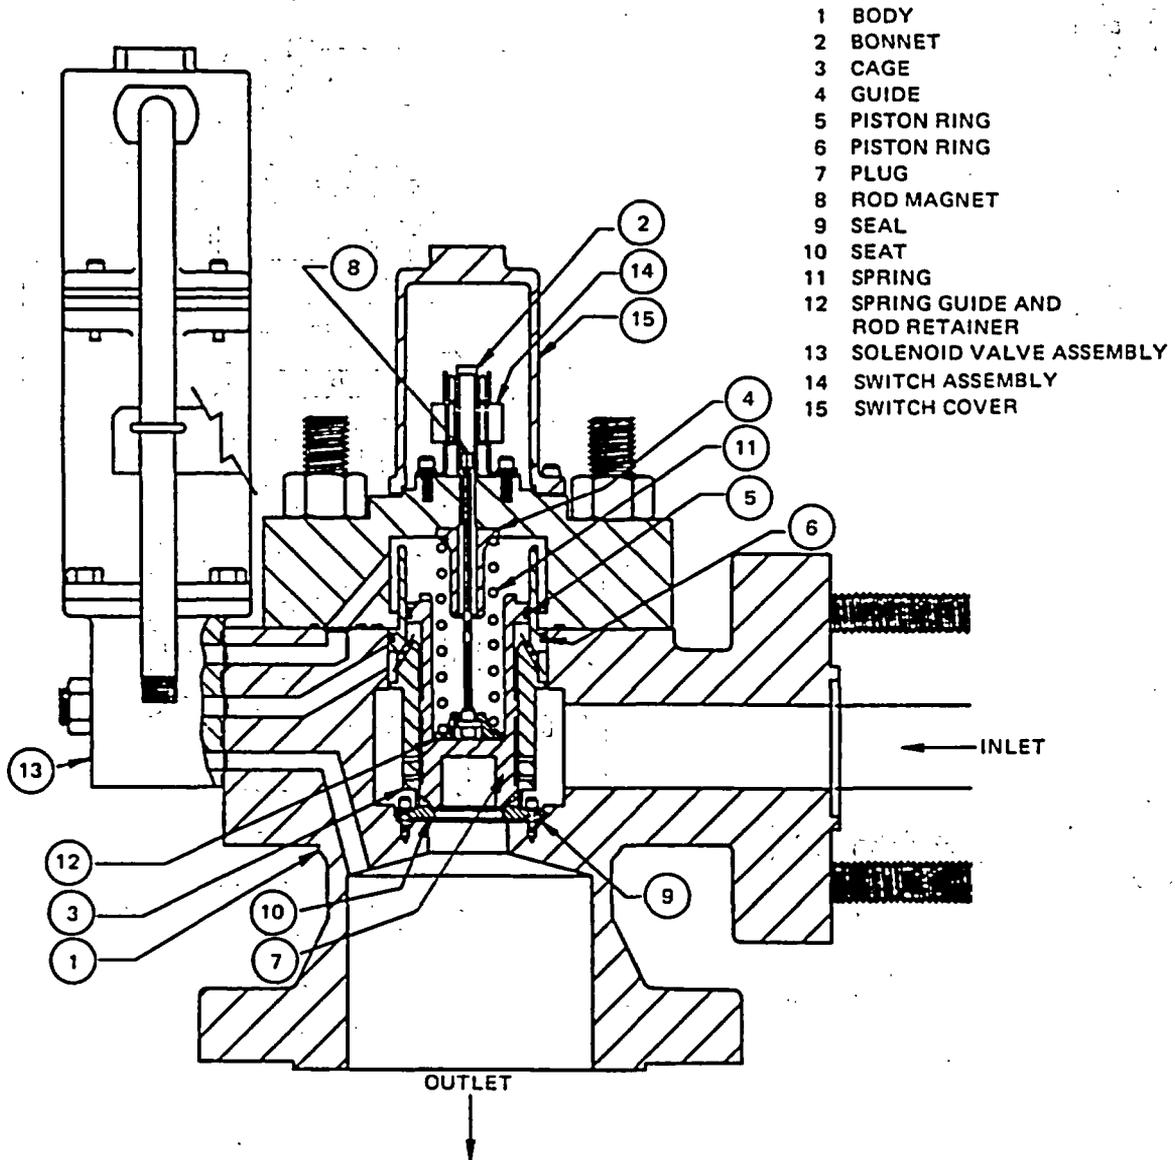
Pilot-operated relief valve (Courtesy of Crosby Valve and Gage Company)
